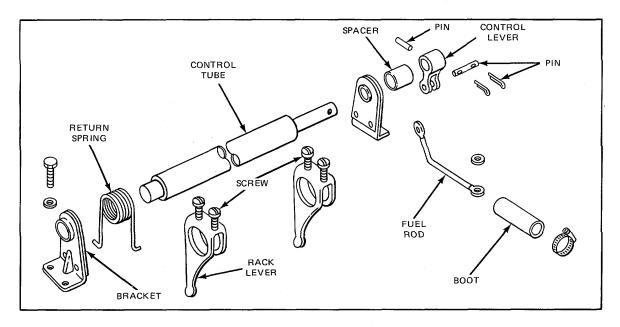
Injector Control Tube Assembly (Non-Spring Loaded-In-line Engine)
